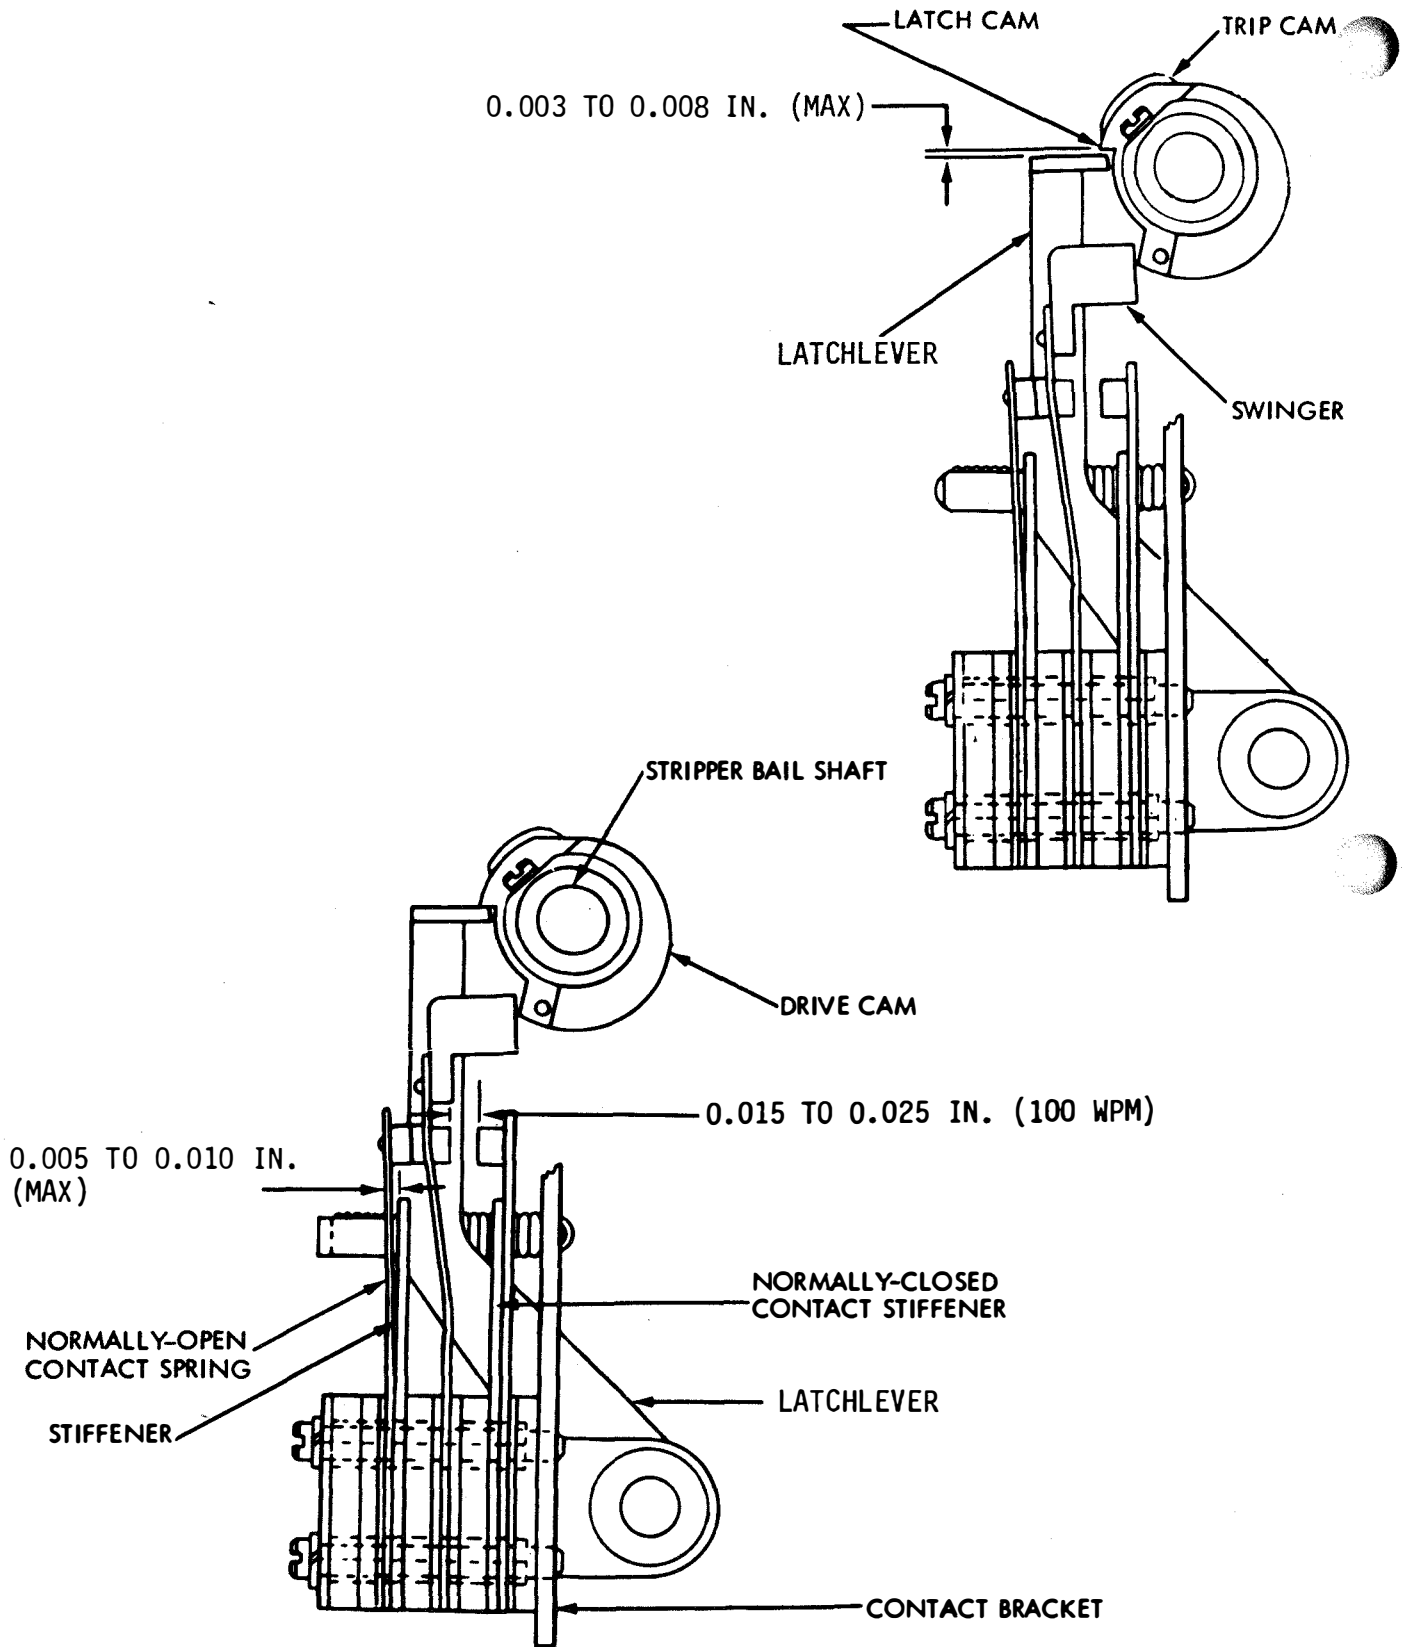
Contact Bracket and Drive Cam, Right Rear View
